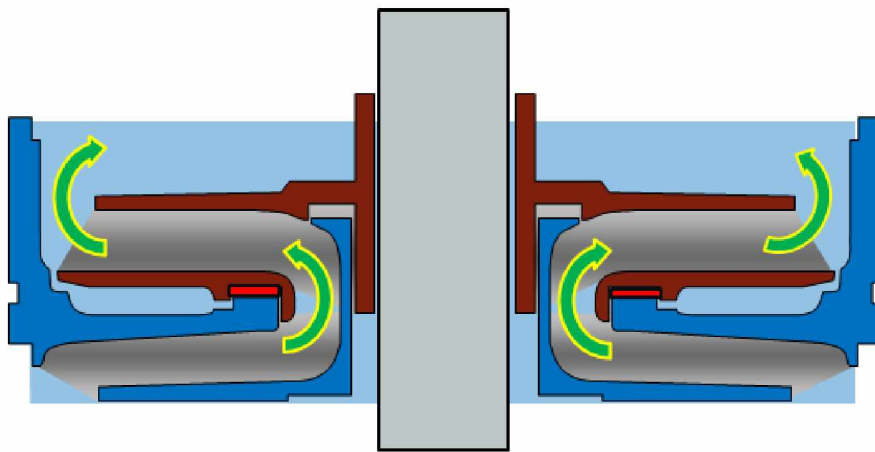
One Stage Impeller (red) and Diffuser (blue) Cross Section with Shaft.
